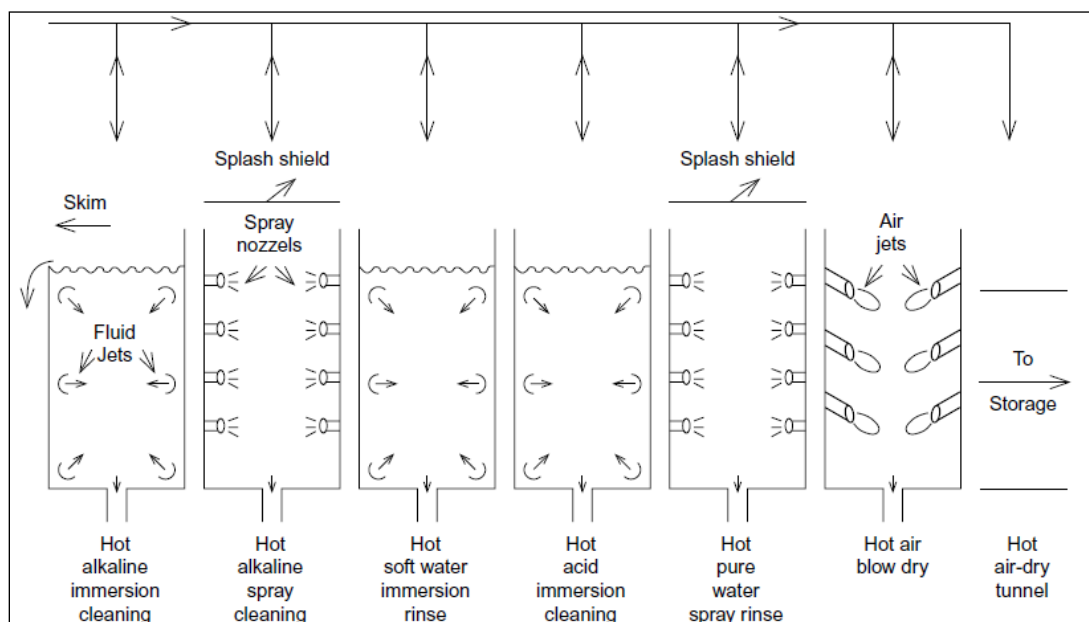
A typical type immersion cleaning line for Metal Parts [59]
